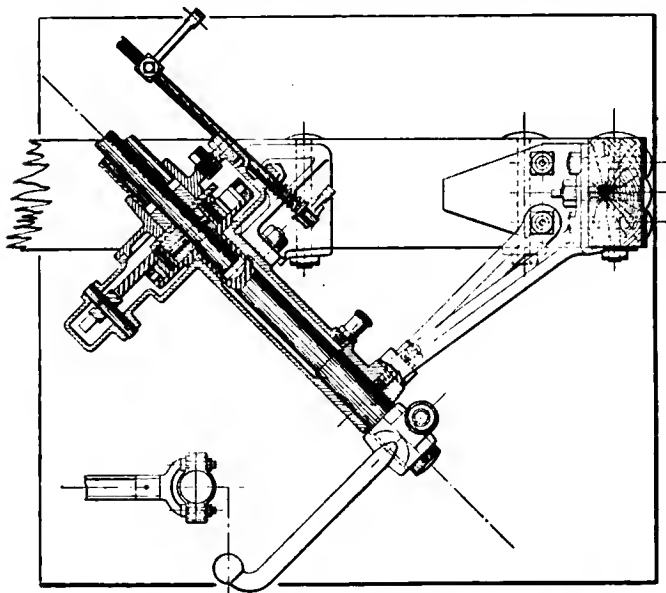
Steering gear, having a 6 : 1 ratio, long bearings, and strong support to frame
